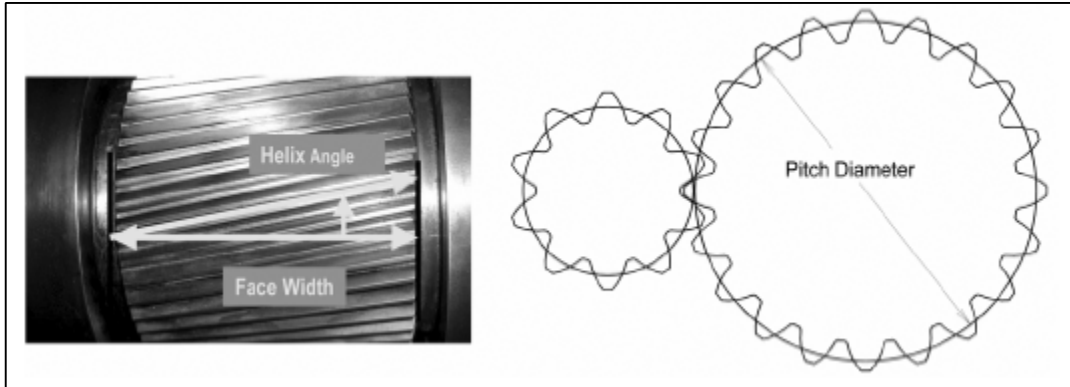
Helical angle, face width and pitch diameter of a helical gear [8]
